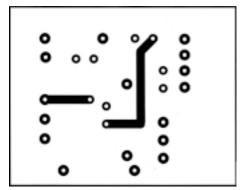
TC1240A Demo Card Assembly Drawing and Artwork
